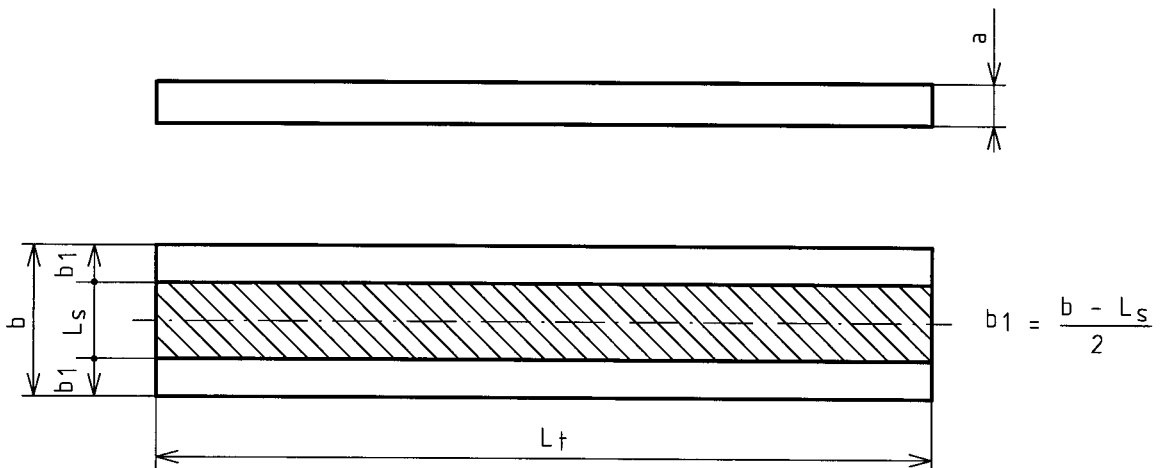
Longitudinal bend test specimen of a butt weld (RBB and FBB)
